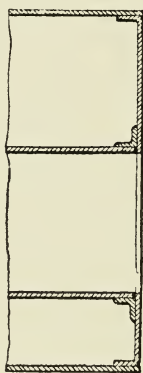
ATTACHMENT OF BACK-END PLATE.
